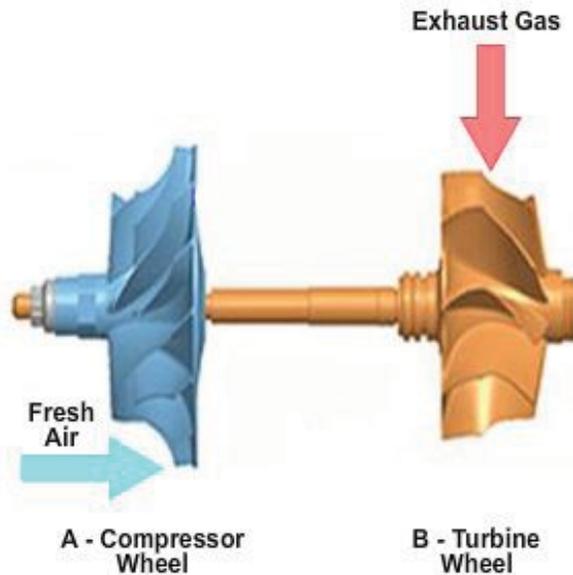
A-Compressor wheel and B-Turbine wheel.
